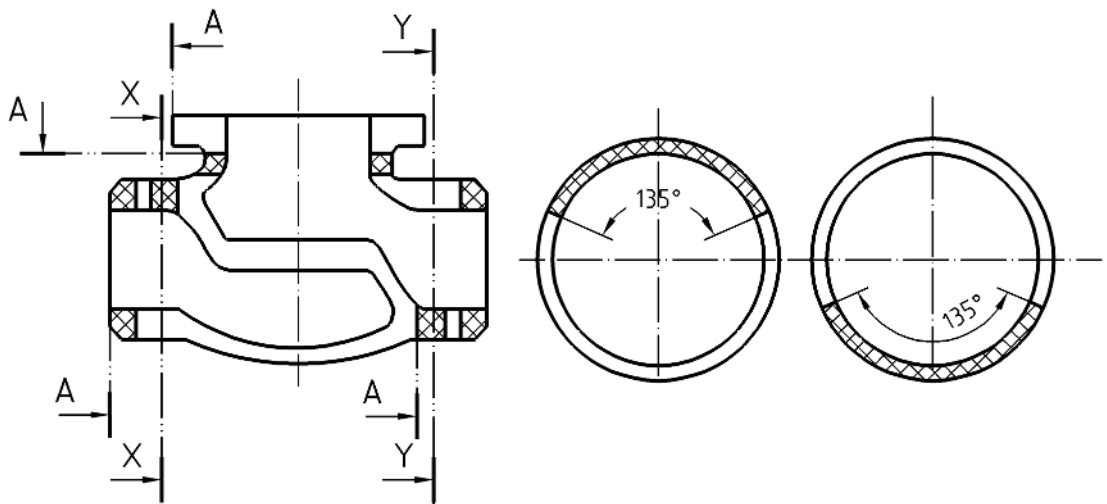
Typical casting section showing required radiographic examination of globe valve body (flanged bonnet)
